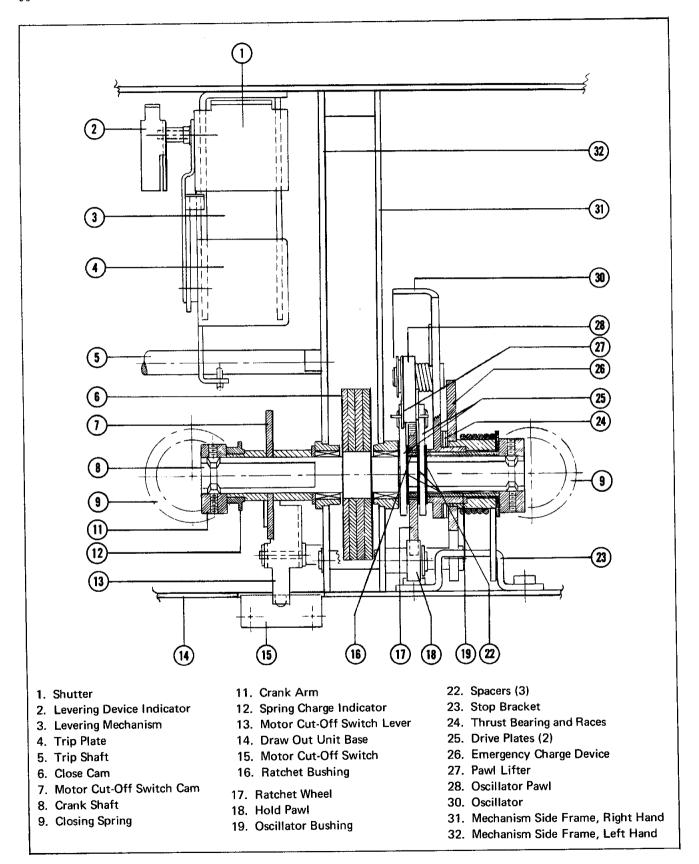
Front View Showing Major Parts of the Crank Shaft Assembly. Some Parts are Omitted for Clarity
